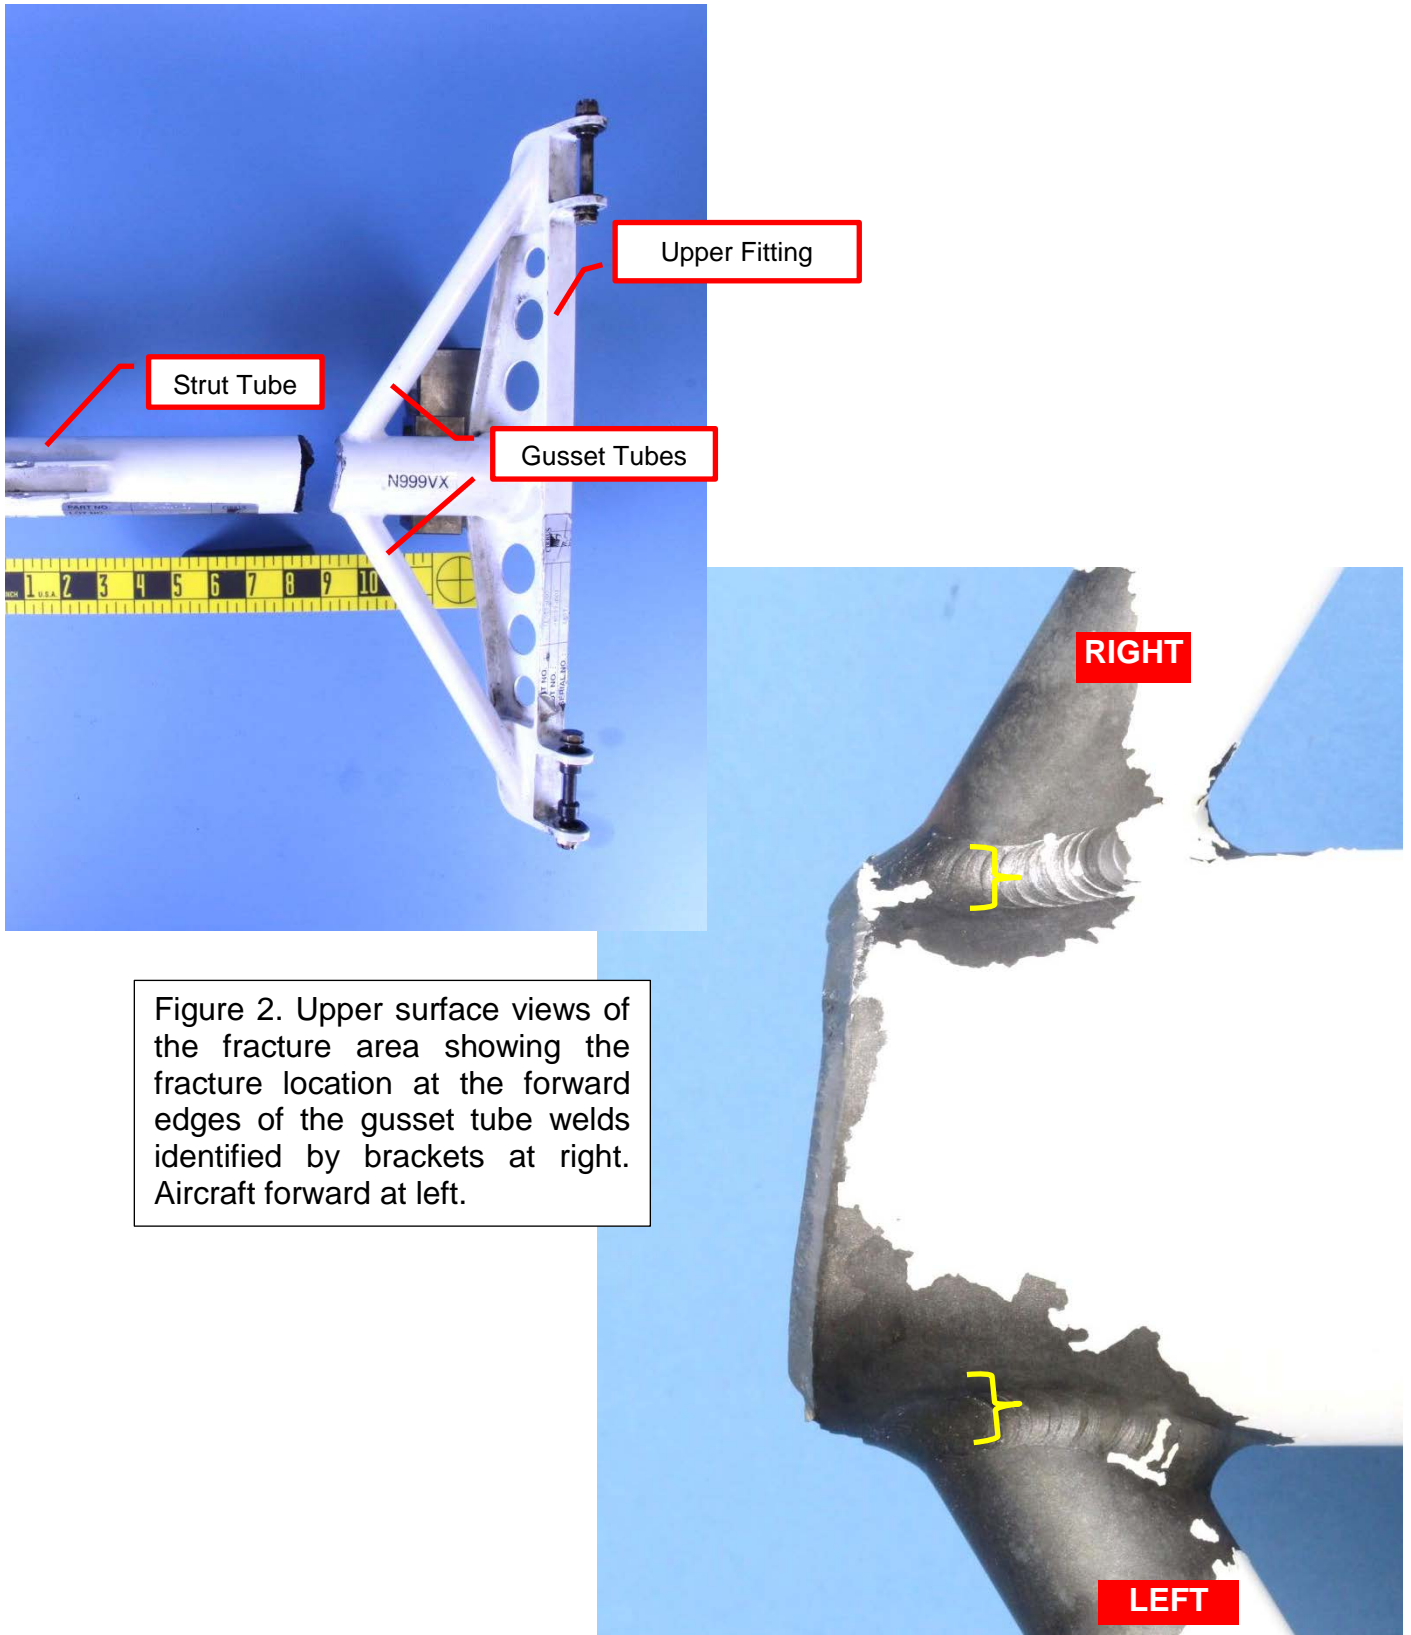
Upper surface views of the fracture area showing the fracture location at the forward edges of the gusset tube welds identified by brackets at right. Aircraft forward at left.
